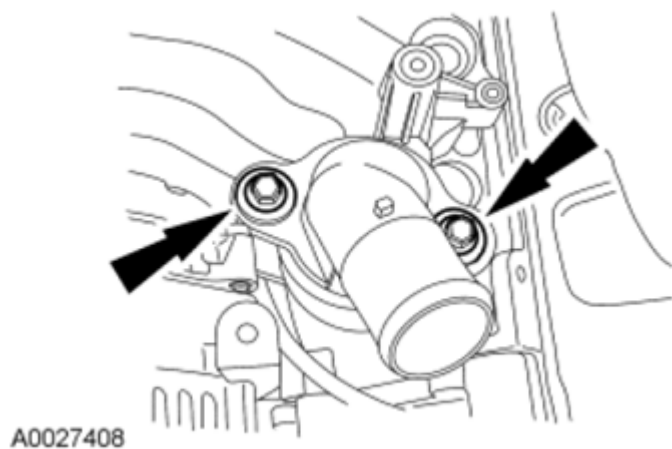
Locating Coolant Outlet Adapter Mounting Bolts
